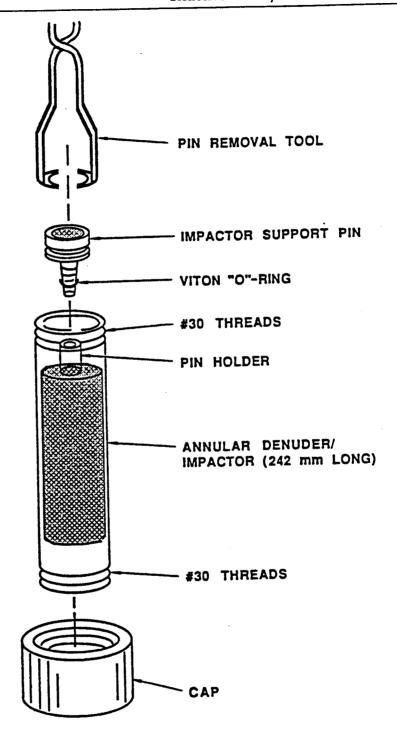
Glass Annular Denuder with Inset Impactor Assembly
